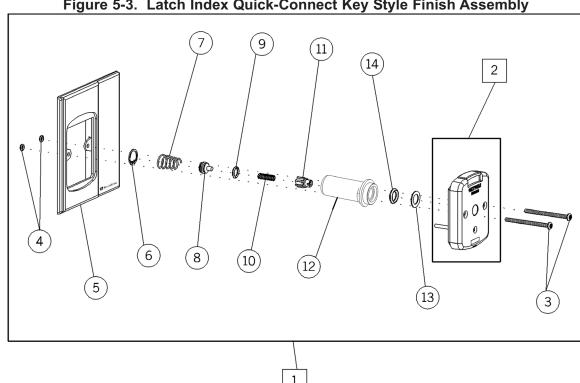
Latch Index Quick-Connect Key Style Finish Assembly
